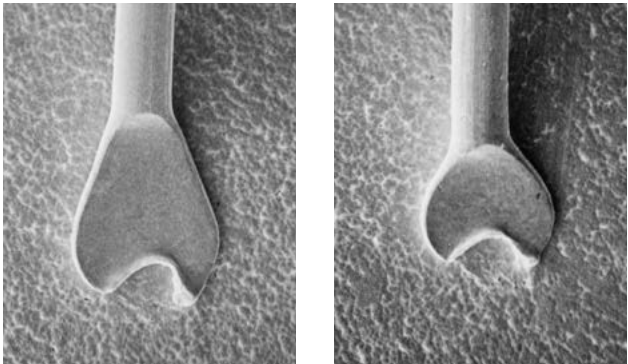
& 6 – The stitch bond on the left is made with a T=0.0090 in./229µm and the stitch bond on the right is made with a T=0.0059 in./150µm. A larger T dimension provides a longer bond length and therefore a larger surface area for a superior intermetallic weld.
